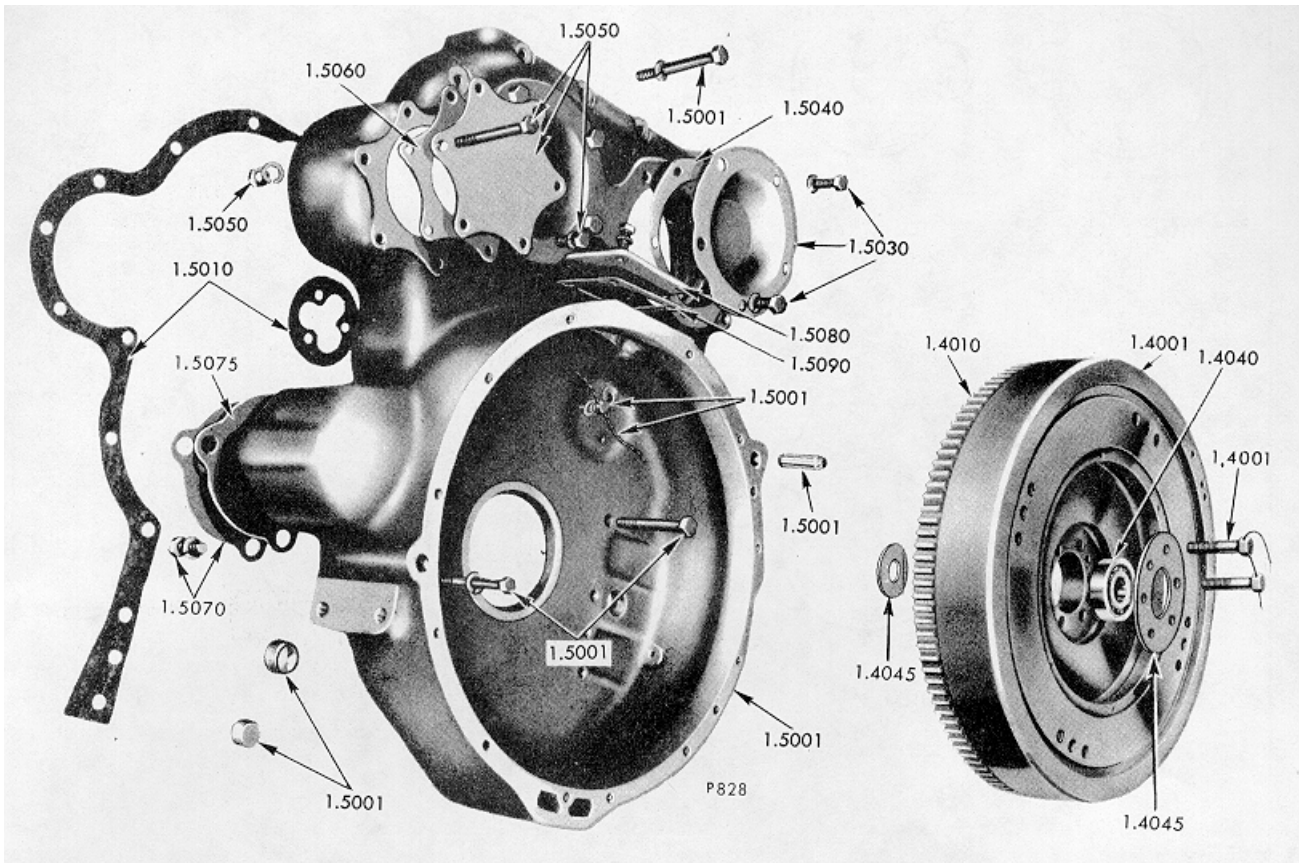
A. FLYWHEEL AND FLYWHEEL HOUSING
